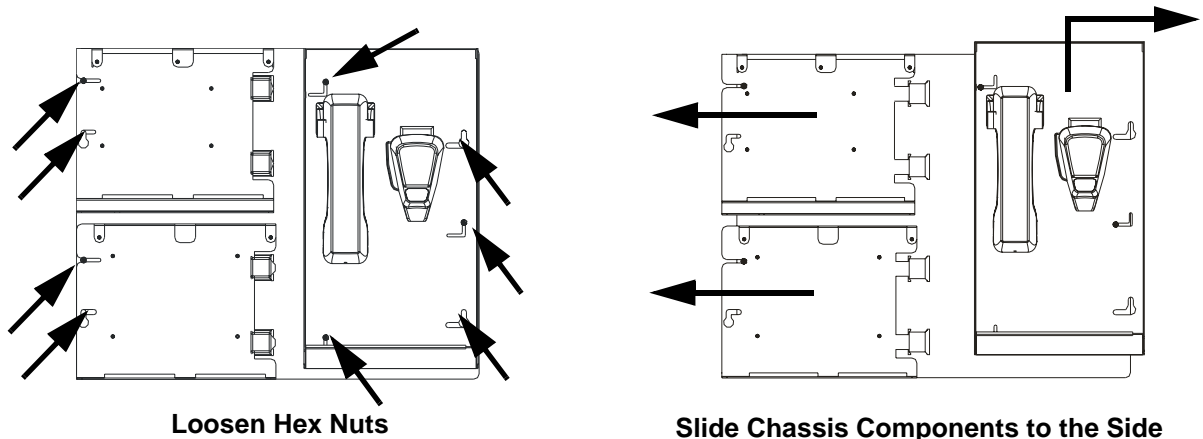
Moving Aside the CA-2 Chassis Components for Wiring Access
